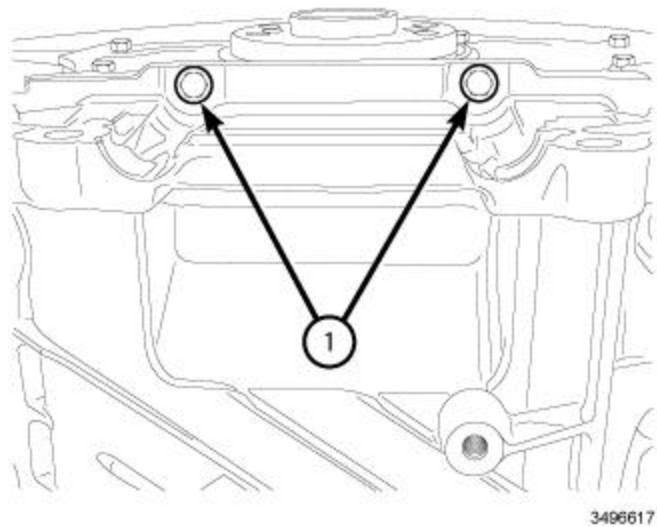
Rear Oil Seal Retainer Flange Bolts
